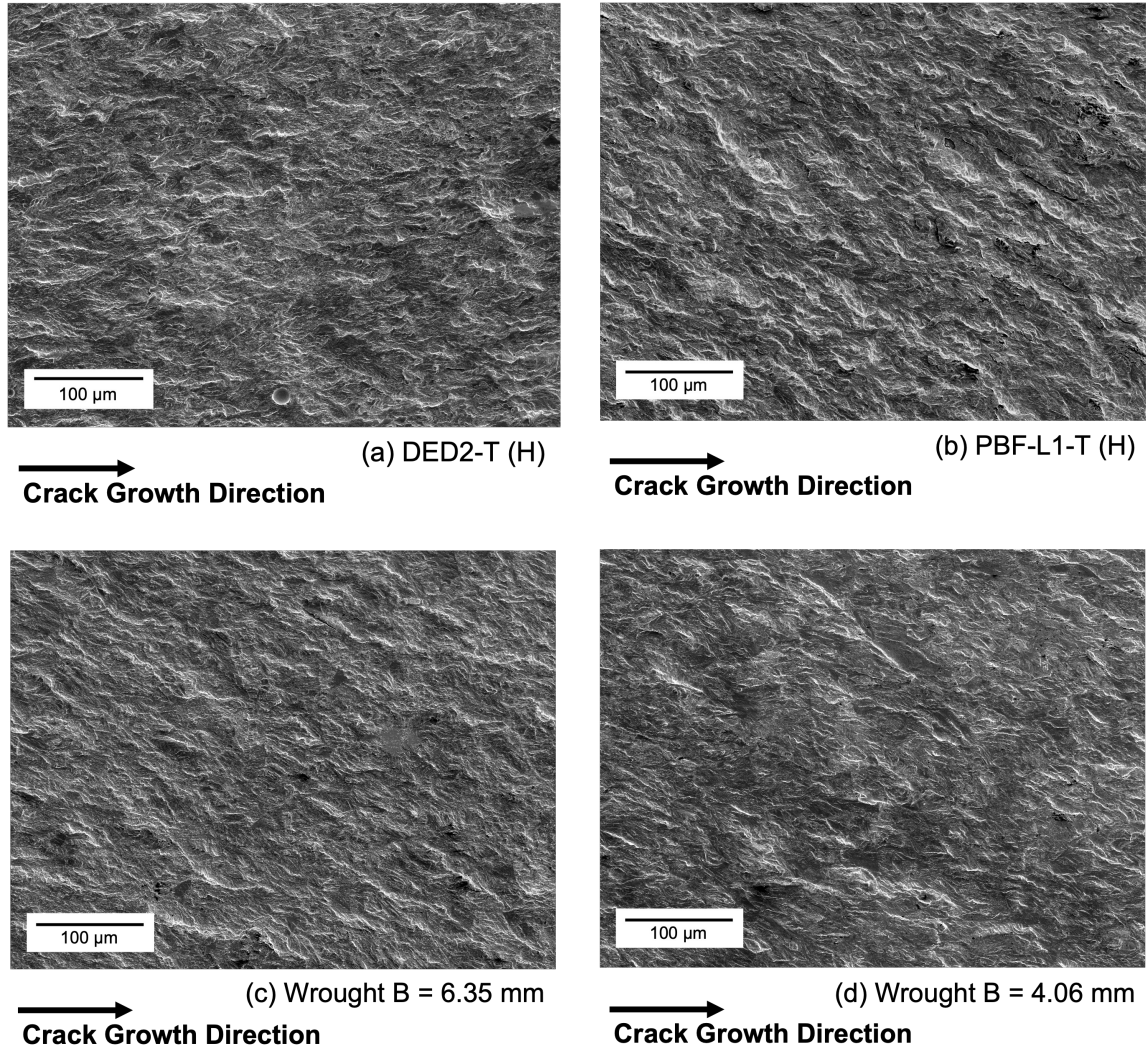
Fatigue crack surface images of (a) DED2-T (H) (b) PBF-L1-T (H) (c) Wrought ($B = 6.35$ mm) and (d) Wrought ($B = 4.06$ mm). Build direction is normal to the crack surface for the AM specimens.
